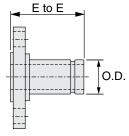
SS STAINLESS STEEL FLANGE ADAPTER
